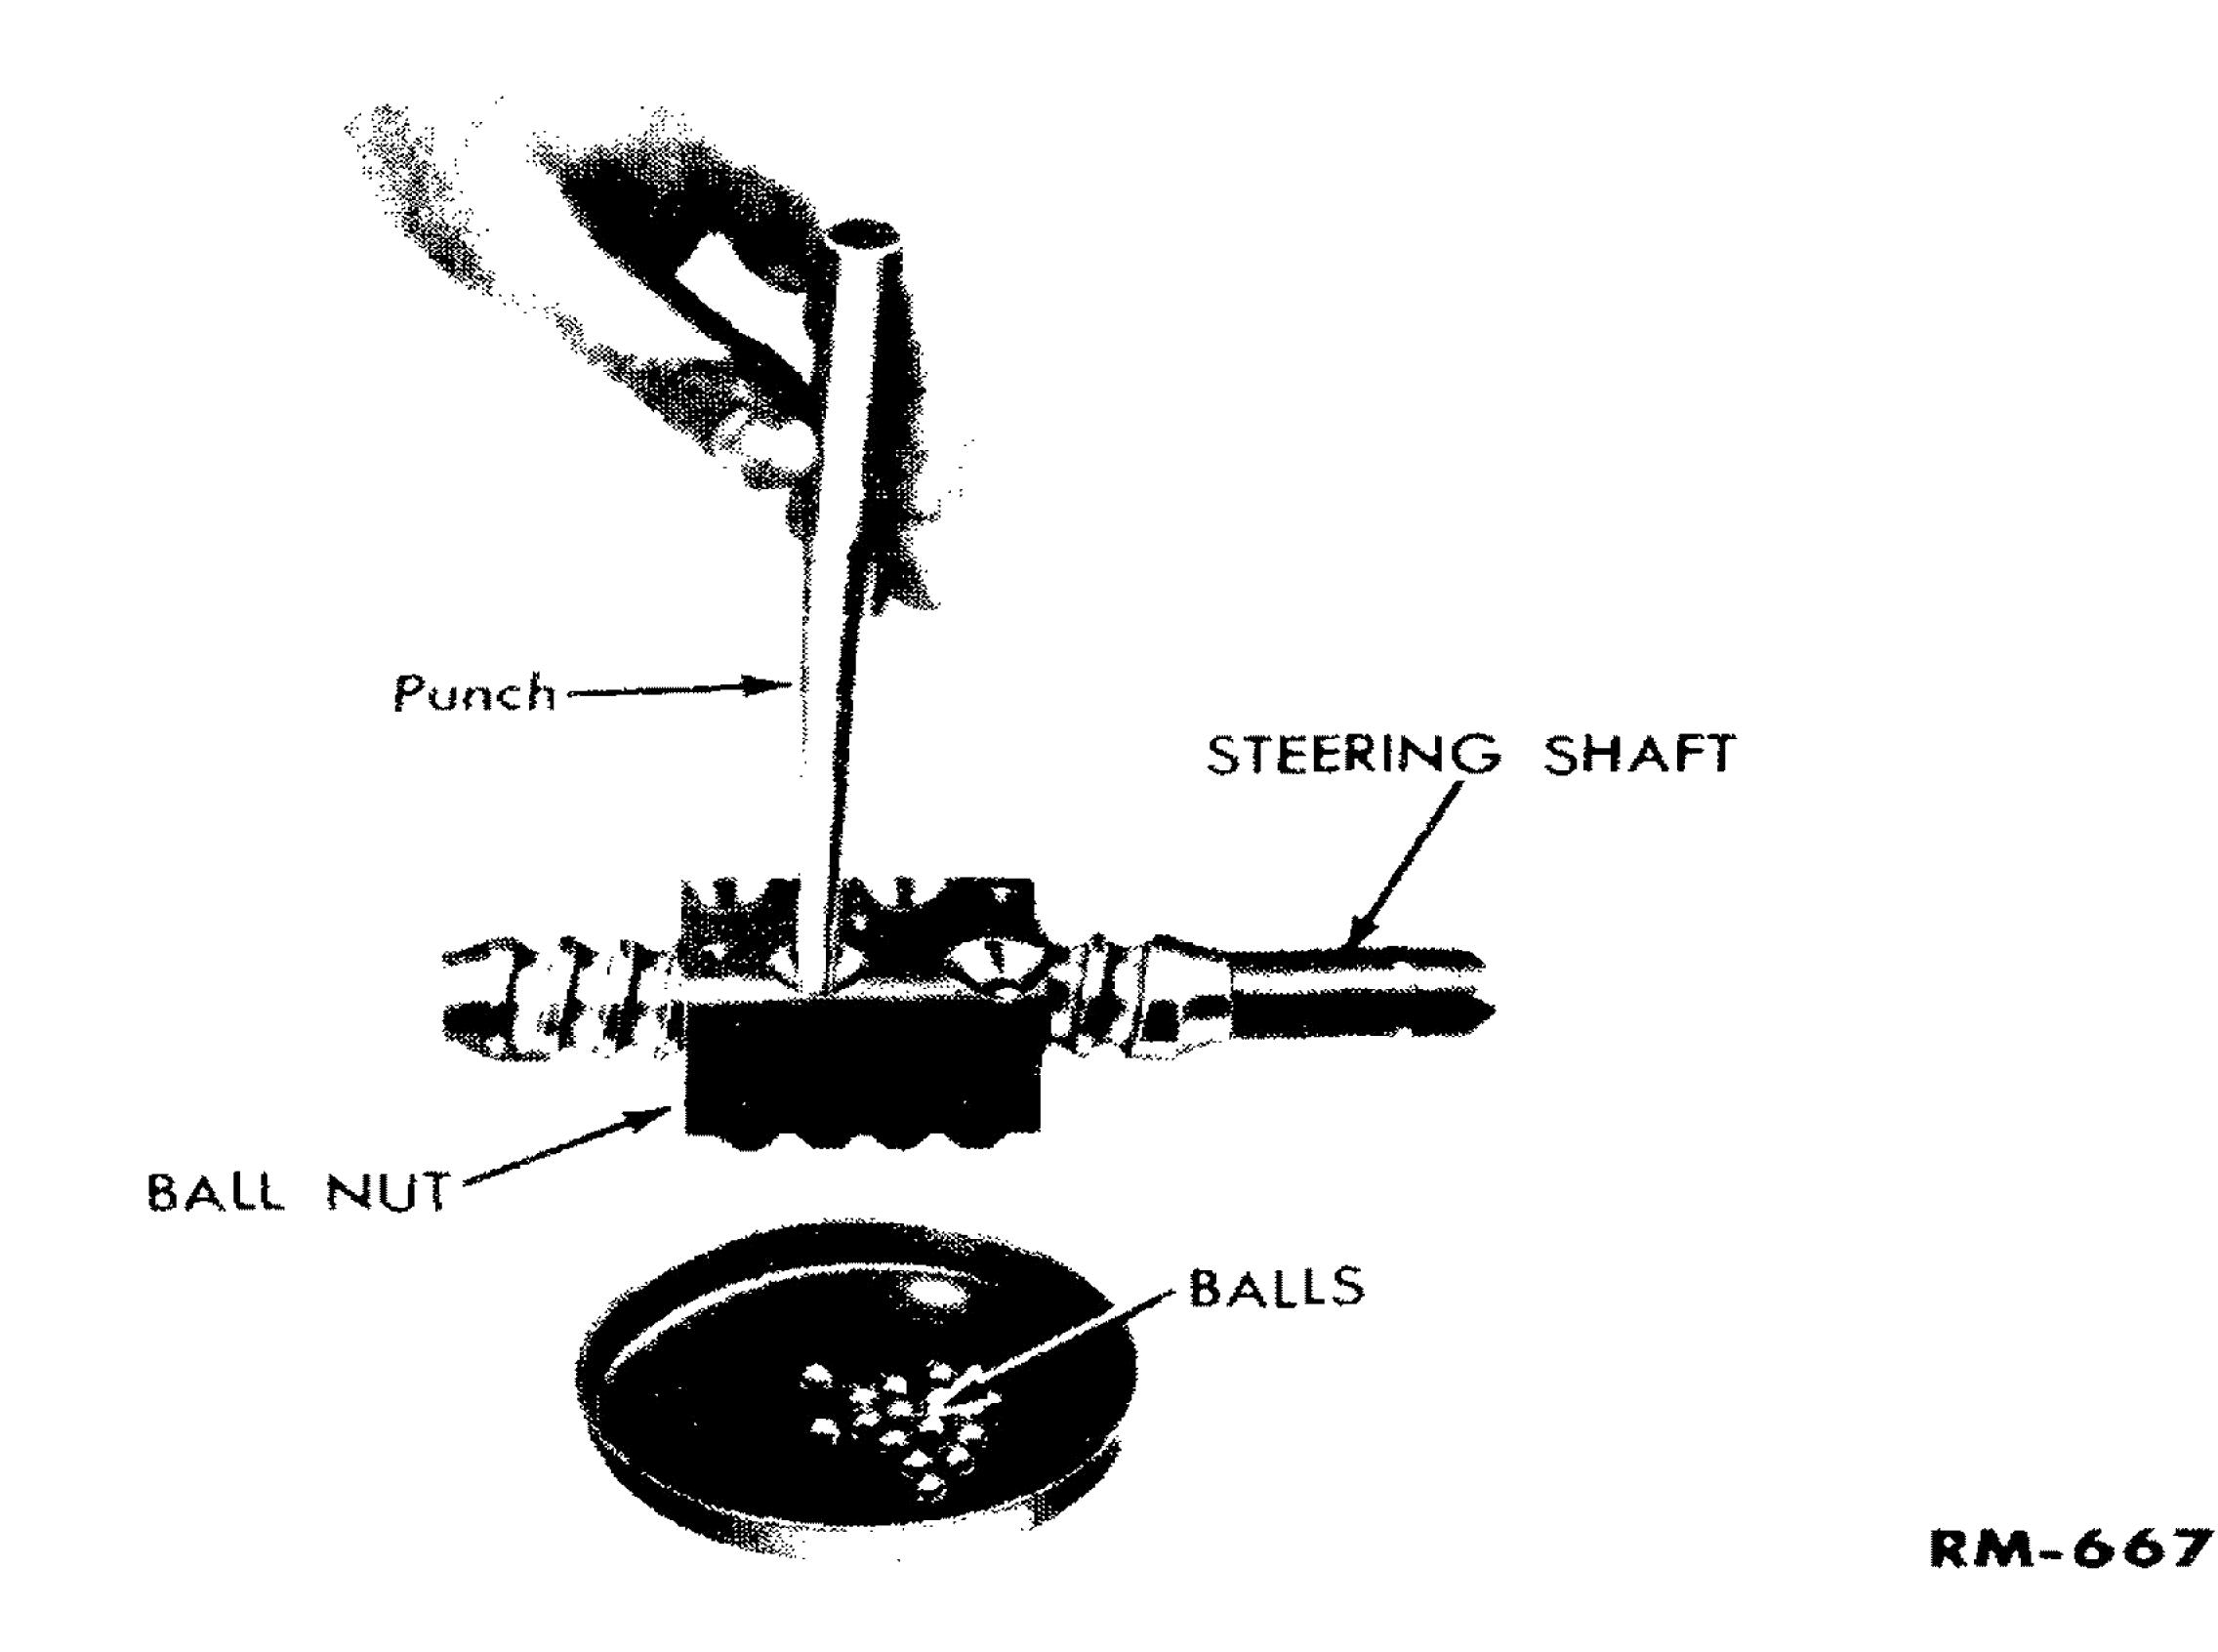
Aligning Ball Nut on Steering Tube Shaft
